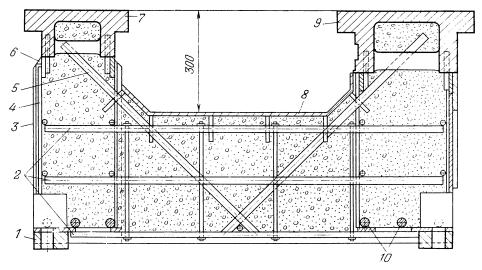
Cross section of a reinforced concrete bed for the model 1660 heavy lathe
